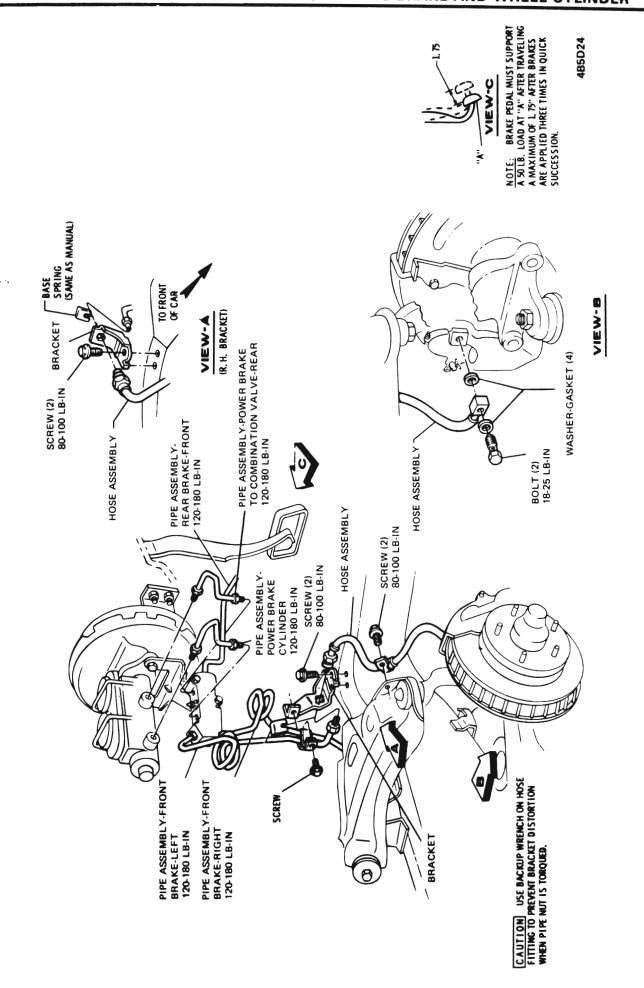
D-24 Front Brake Pipes - X Car Power Brakes
